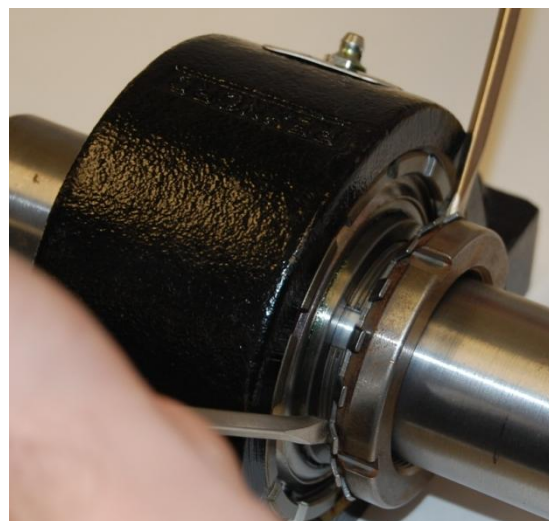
Zero Shaft Fit – Pry against housing to draw adapter sleeve through bearing. Sleeve should not be protruding out the backside of the inner ring.
